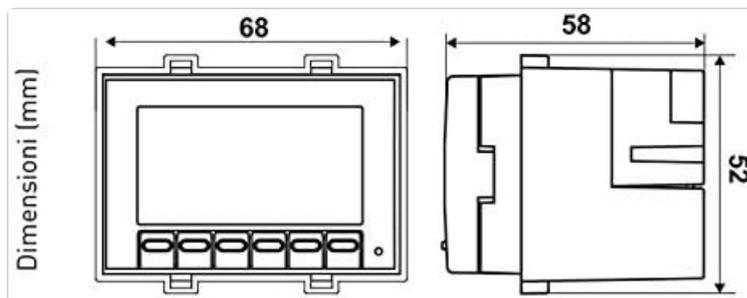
Dimensional drawing of the CH143A thermostat, showing measurements in millimeters for installation planning.
